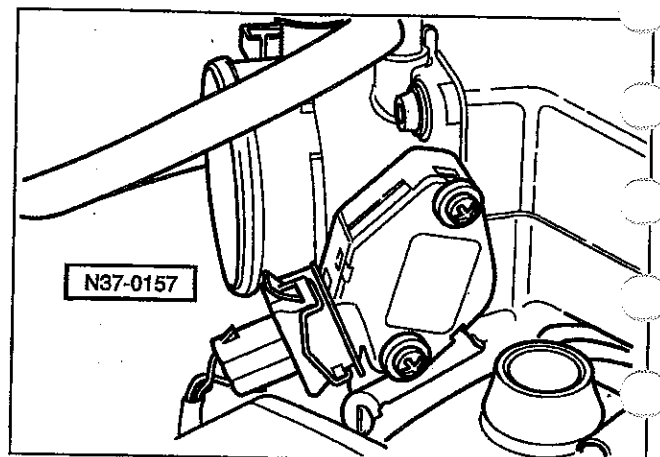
Throttle position sensor mounted to throttle valve housing.
